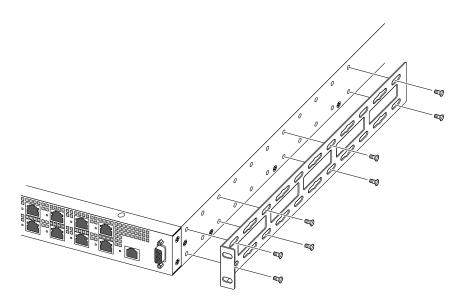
Attaching the Front Mounting Brackets—Cabinet Installation
